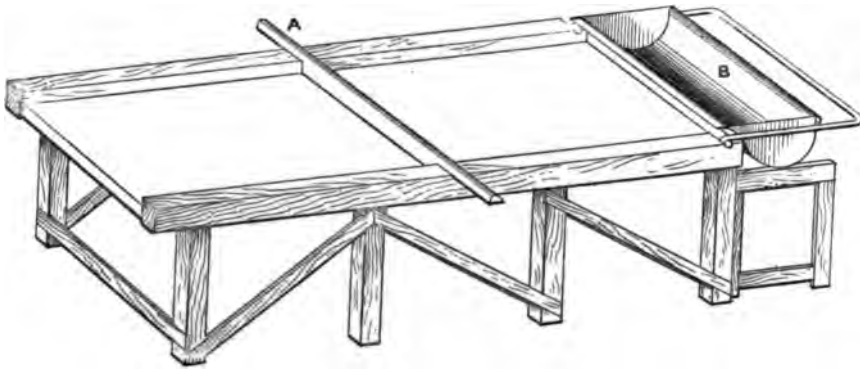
Bench and Tilting-pan for Casting Sheet-lead
